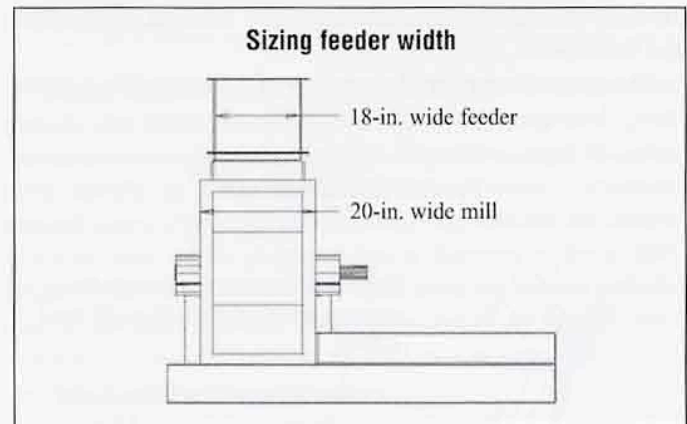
The feeding device needs to provide a uniform curtain of product to the hammermill grinding chamber and the curtain of product should be fed full-width or near full-width across the hammermill grinding chamber.
